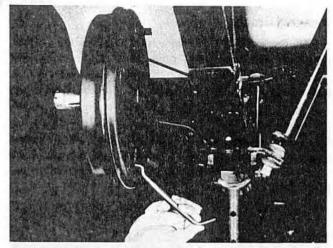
Adjusting the Brakes by Turning the Star Wheel
